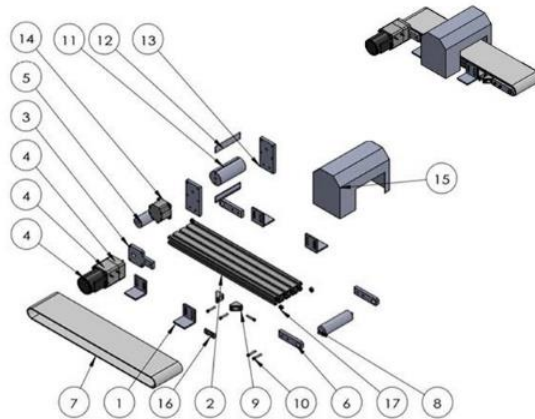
Detailed sketch of the roller cut and belt conveyor design
